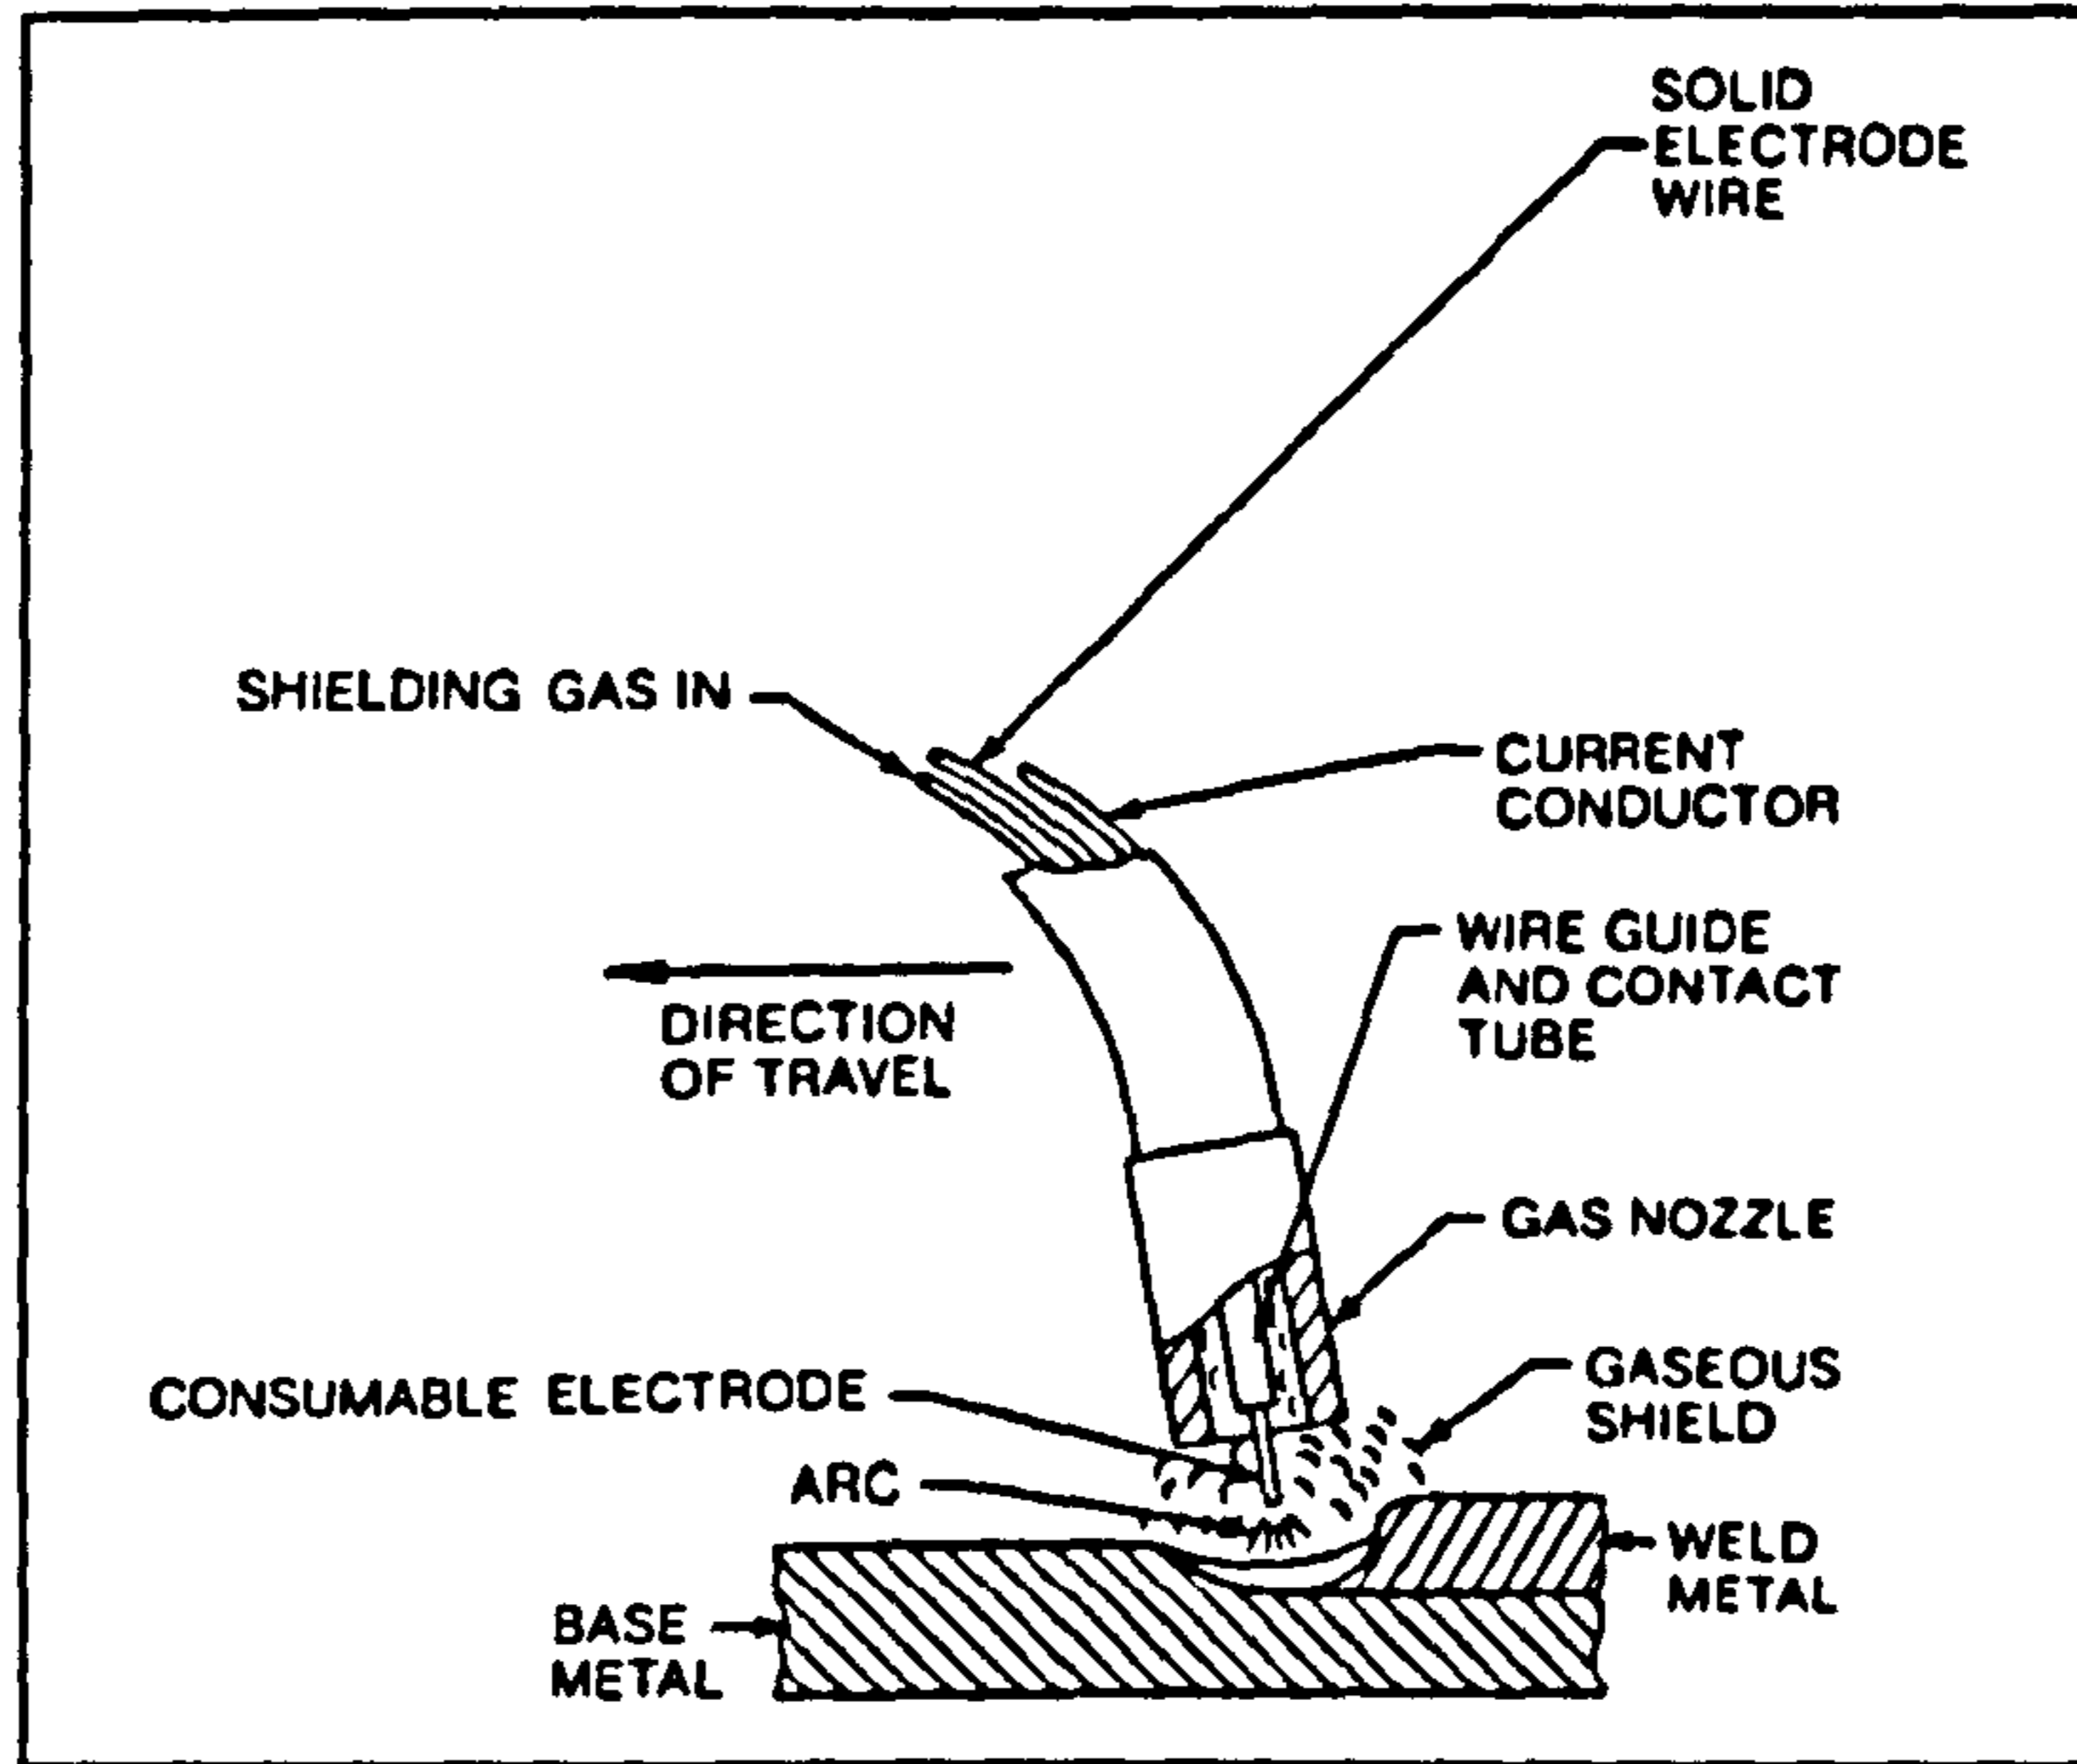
Gas Metal Arc Welding Process [ref. 2]
